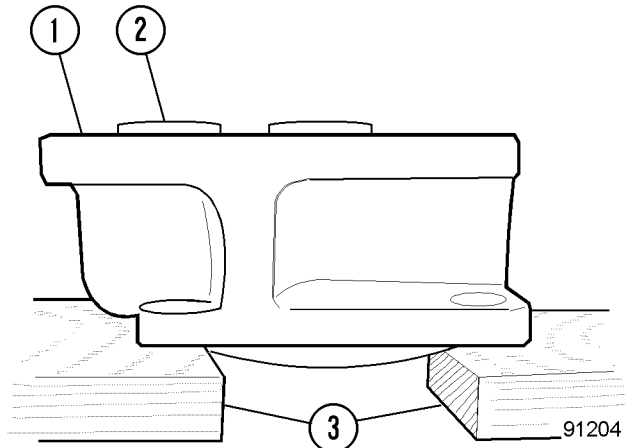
PREPARATION FOR SEAL REMOVAL
